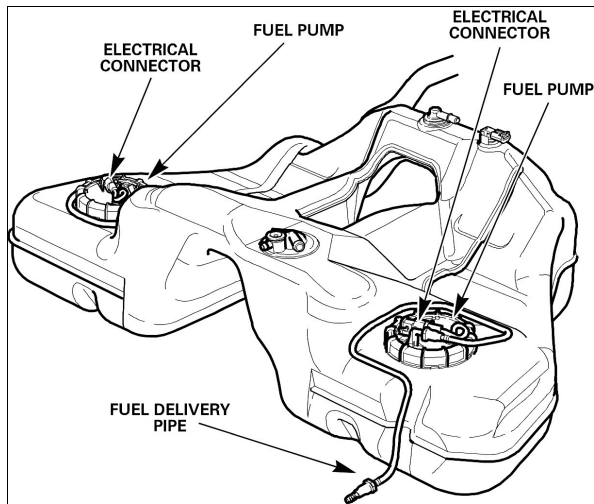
XJ (X350) FUEL TANK (SC ENGINES)
